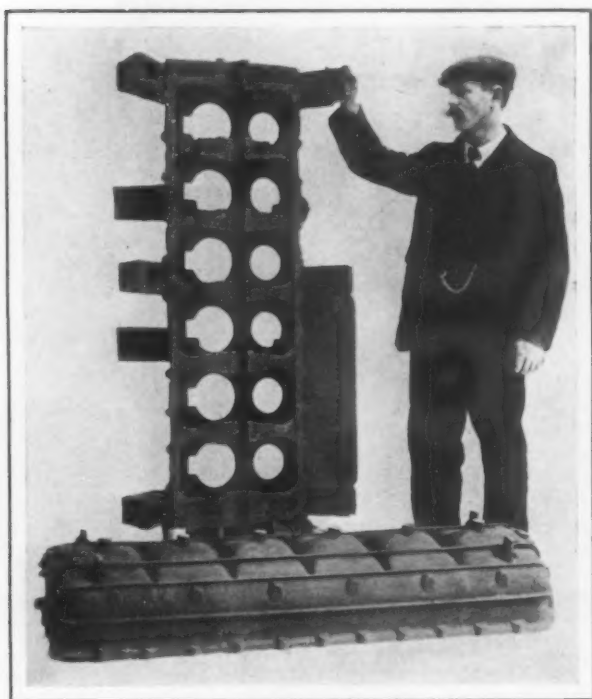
Upper and Lower Halves of Crank Case for Six Cylinder Automobile Engine
